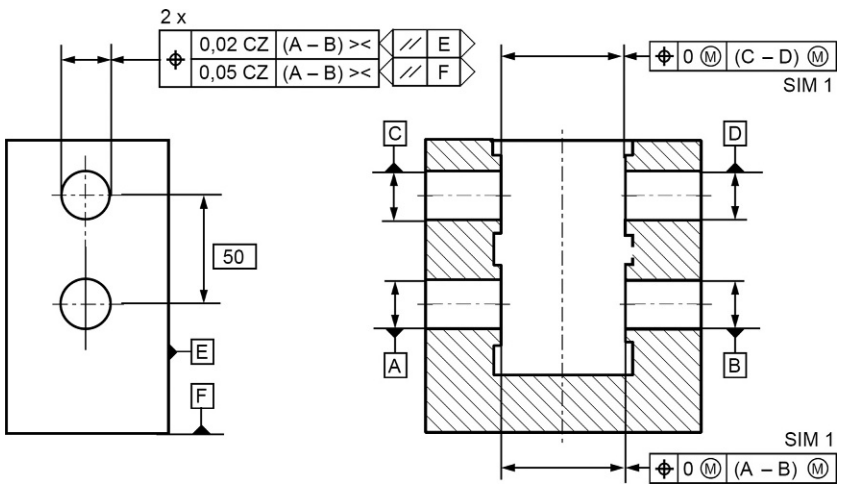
Tolerancing with and without M , gearbox
